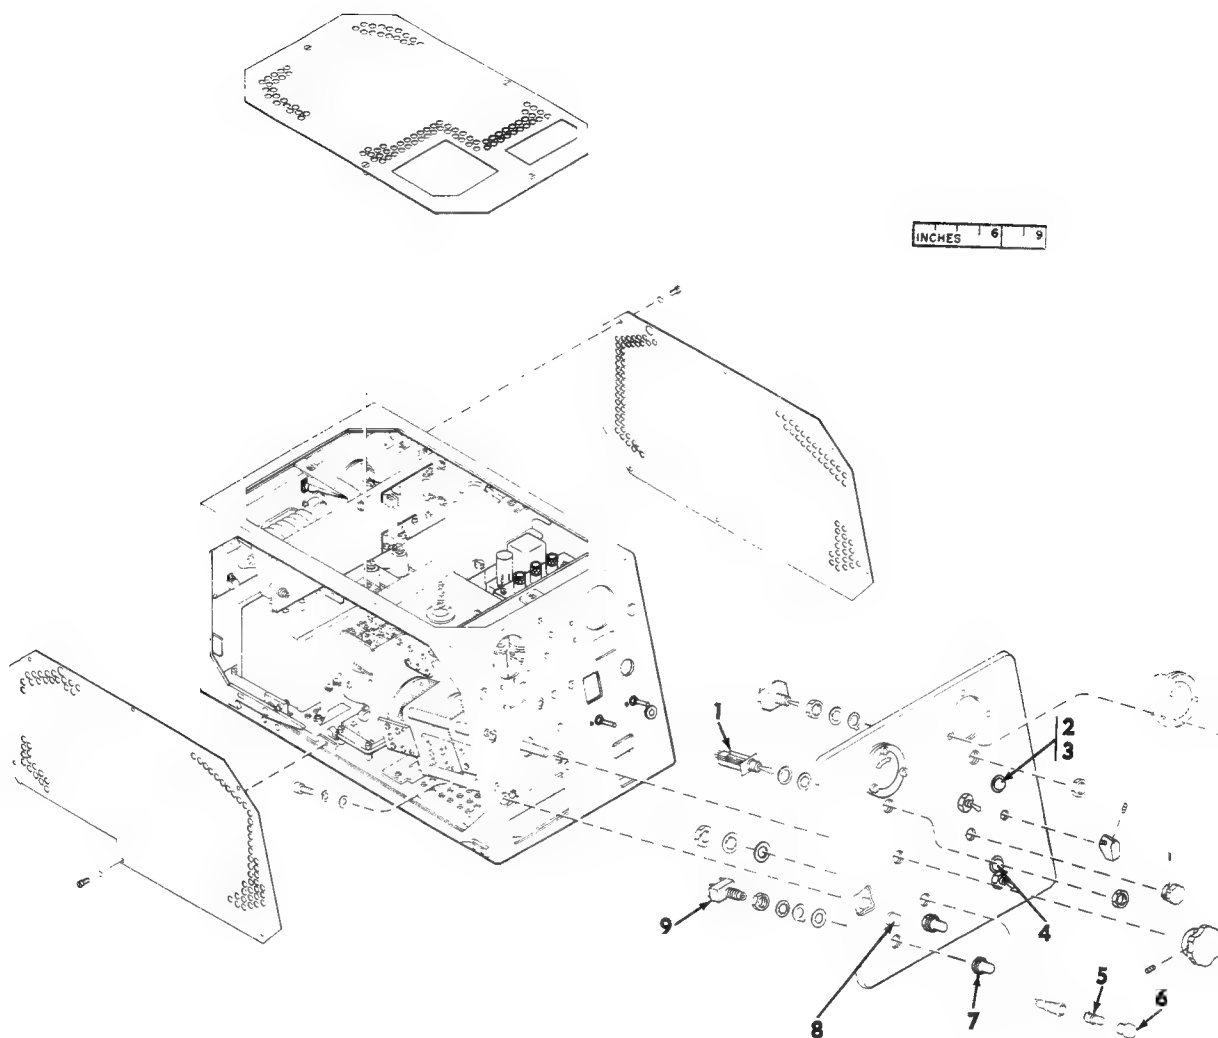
Control, antenna C-1469/M (7621540)—exploded view
